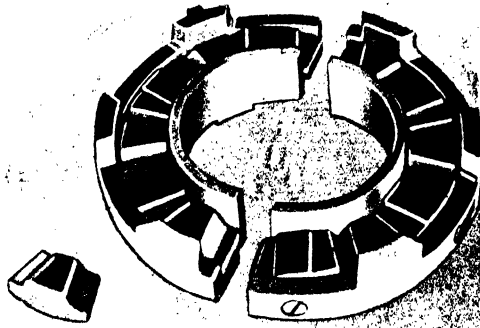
Thrust bearing with “levelling plates” for pads by Kingsbury Machine Works Inc., Philadelphia.
